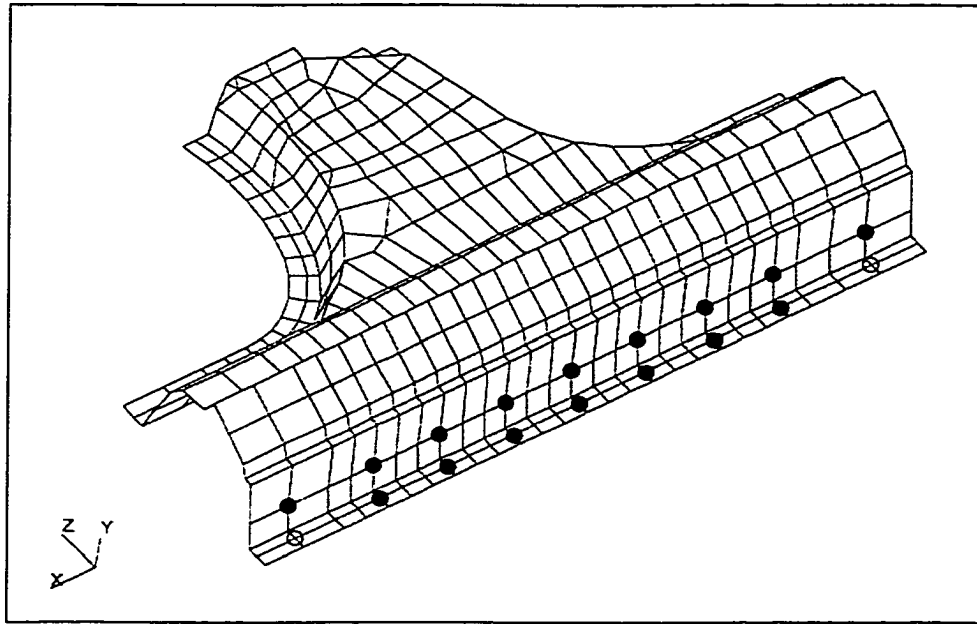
Optimal Design Pattern of Spot Welds (Case 1, Part C, View 2)
